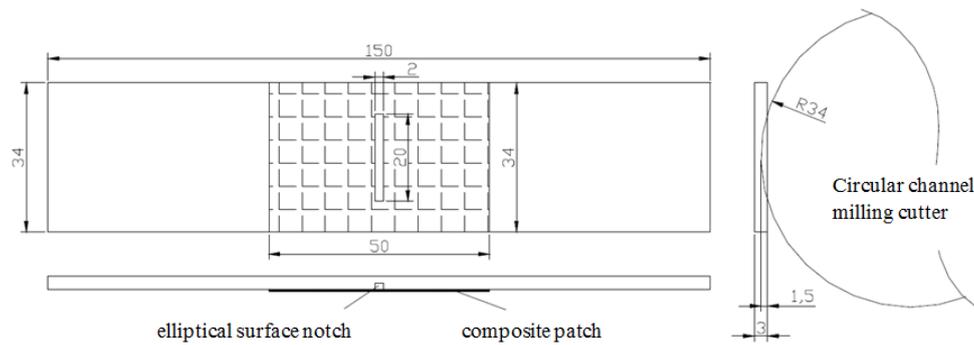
Views and dimension of test specimen with elliptical surface notch and composite patch
